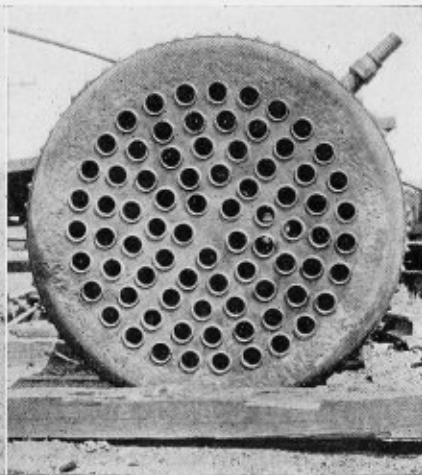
New Tube Area of Top Flue Sheet of Pump Boiler Welded in Place
